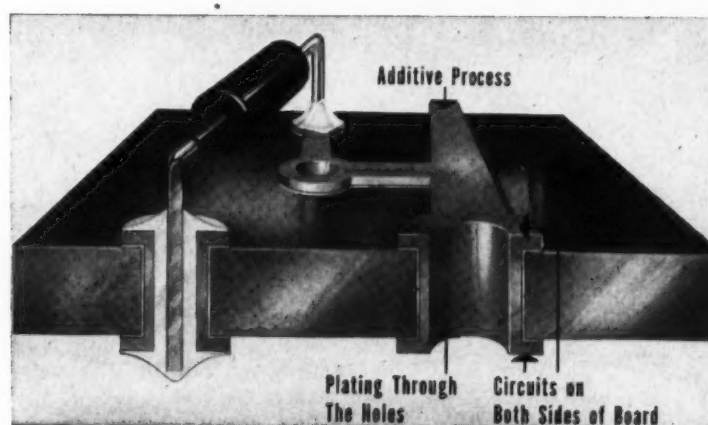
Cross section of "THRU-CON" board. (Drawing courtesy General Electric Co.)
